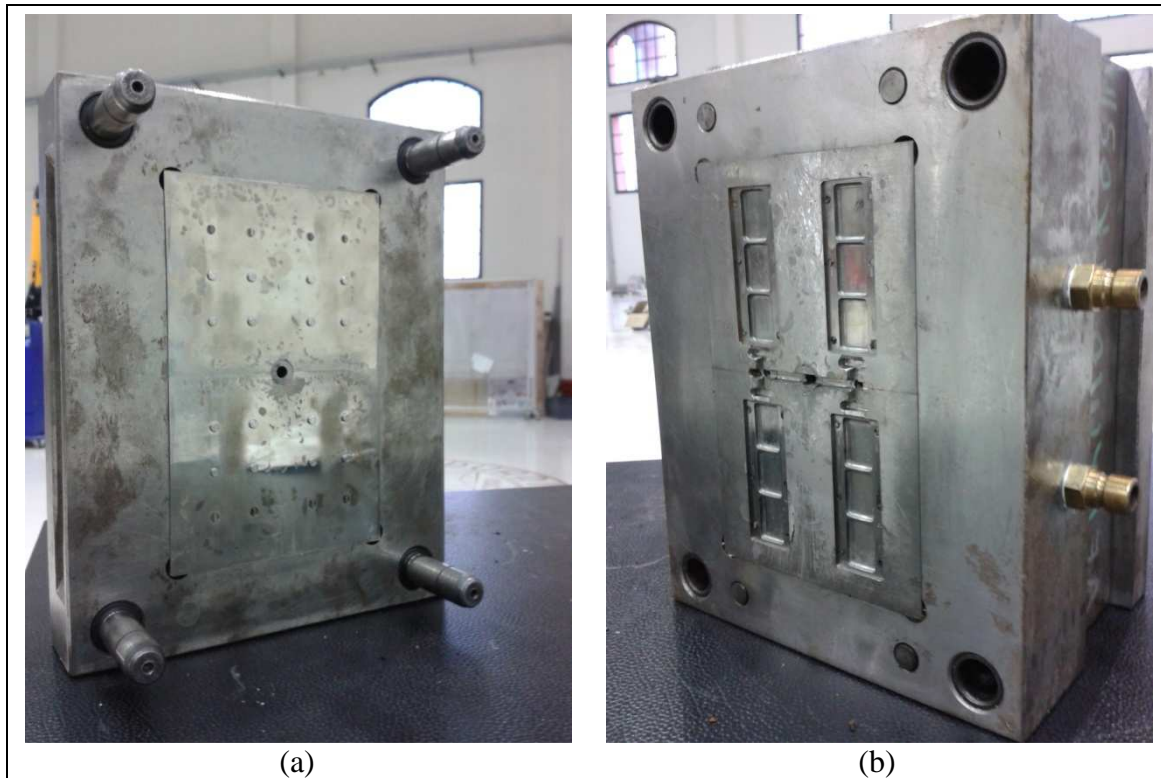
The new RHCM mould for cover plate. a) The fixed part b) The rotating part.
